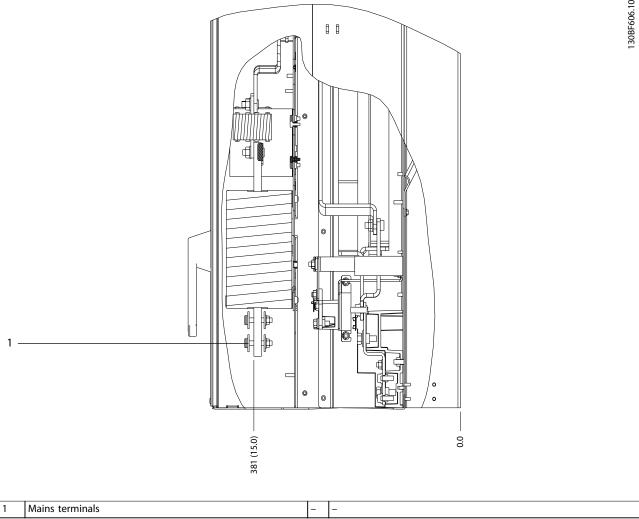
Terminal Dimensions for E2 with Disconnect (380-480/500 V Models: P355-P400), Side View
